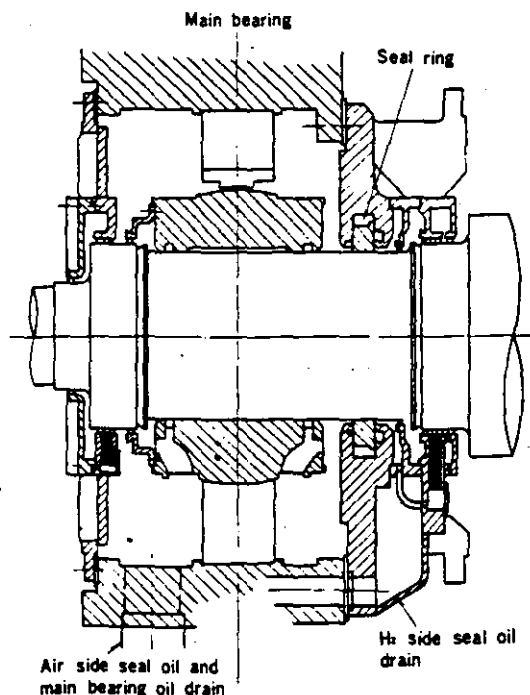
Gland seal assembly and associated apparatus—inner cooled
